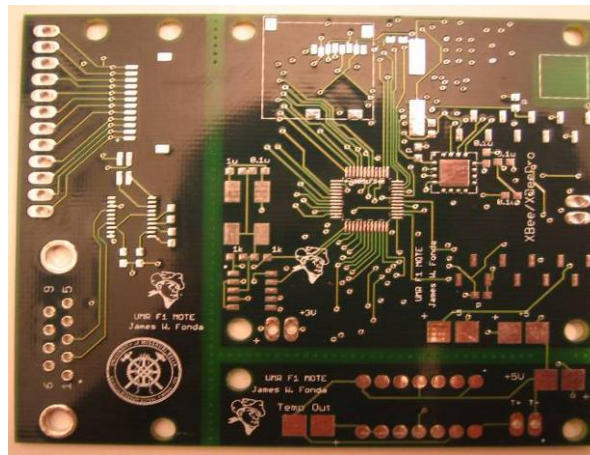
F1 Mote PCB showing the main-board (top-right), the thermocouple board (bottom-right), and the expansion connector (left)
